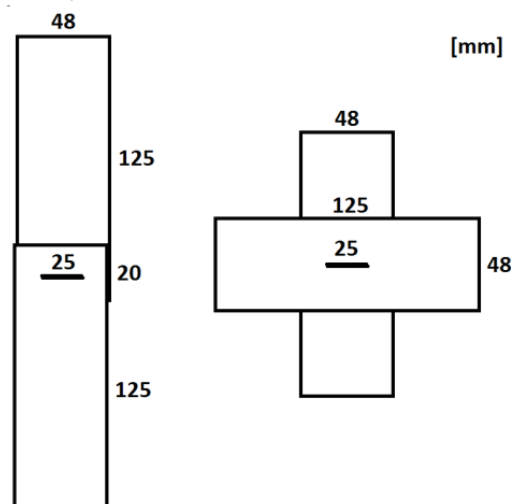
The dimension of shear tensile and cross-tension test specimens. The weld length used was 25 mm.
